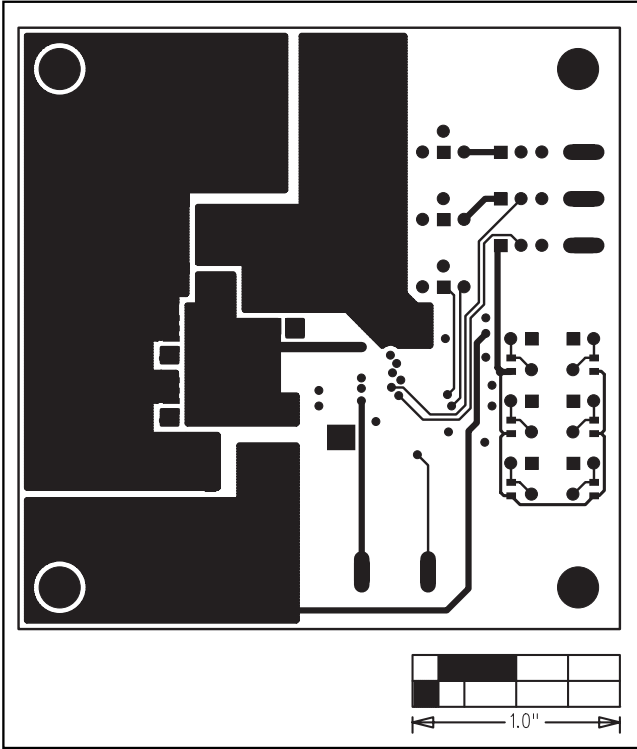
MAX8720 EV Kit PC Board Layout—Component Side
